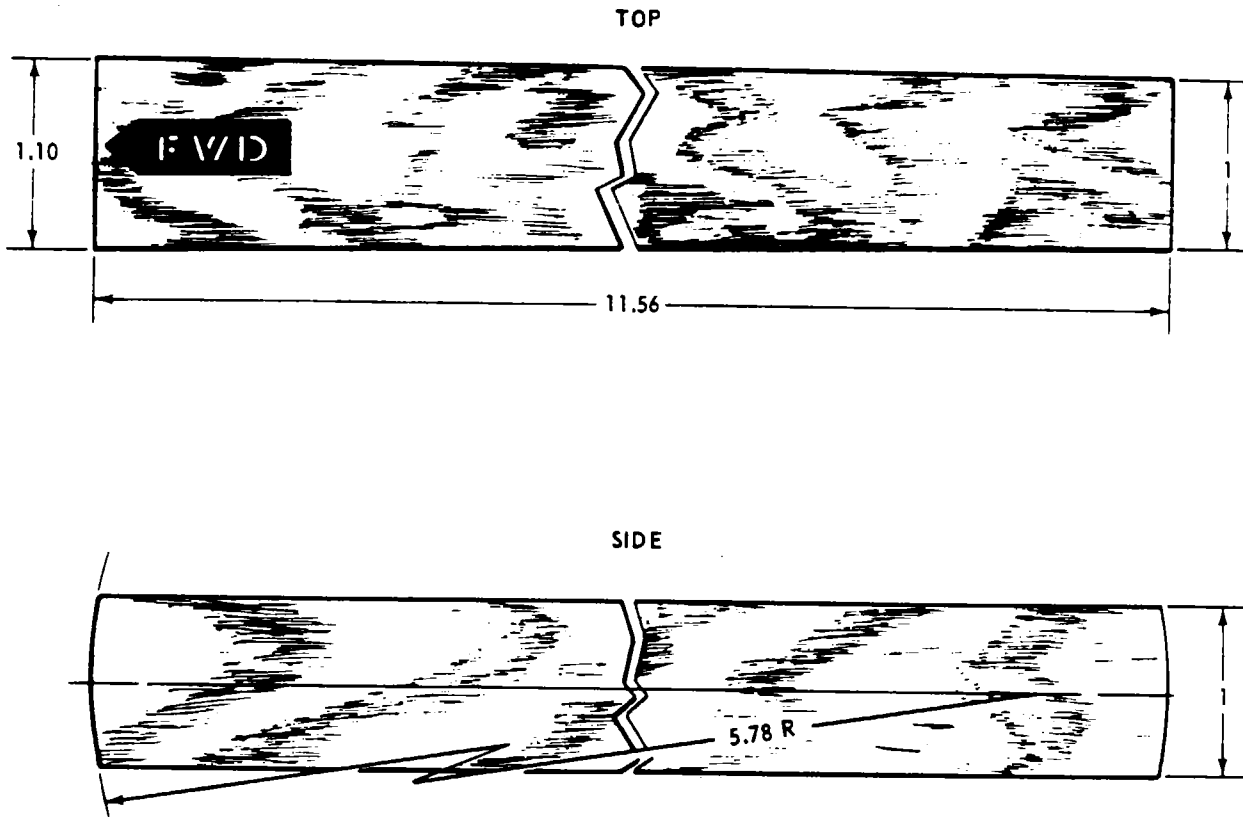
Fabricated Tool, Checking Main Gear Side Brace Link Travel
